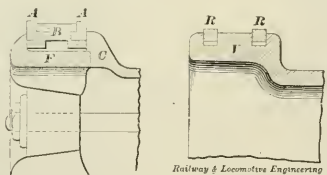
TWO STYLES OF PACKING RINGS FOR PISTON VALVES.
